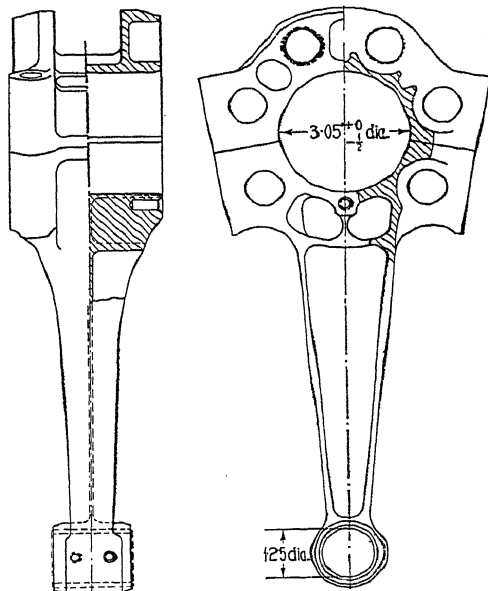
Master rod for the Armstrong-Siddeley "Cheetah" radial engine.
